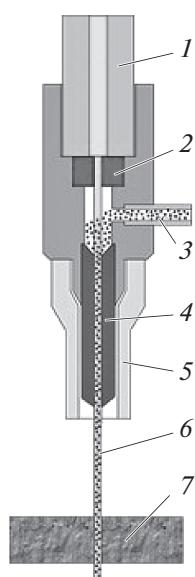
Water-jet cutting: (1) high-pressure water supply; (2) nozzle; (3) abrasive supply; (4) mixer; (5) housing; (6) cutting jet; (7) workpiece.
